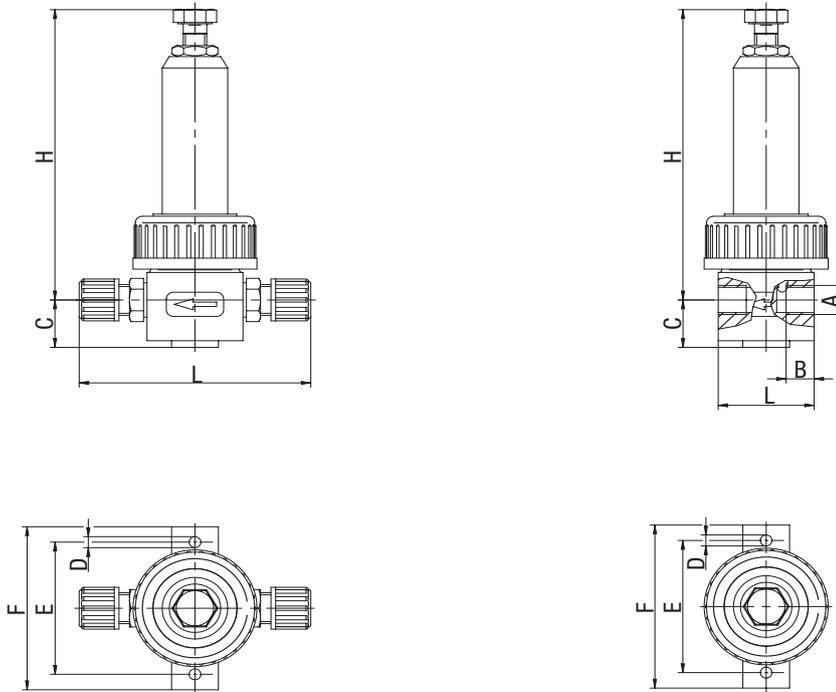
Dimensioned drawing Back-pressure and pressure relief valves DN6 - DN15 (spring-loaded diaphragm valve)
